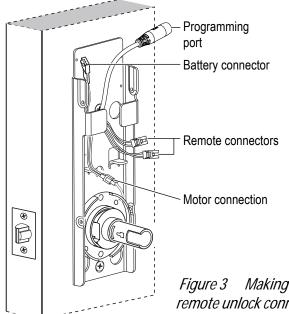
Making the remote unlock connection (cylindrical installation shown)
